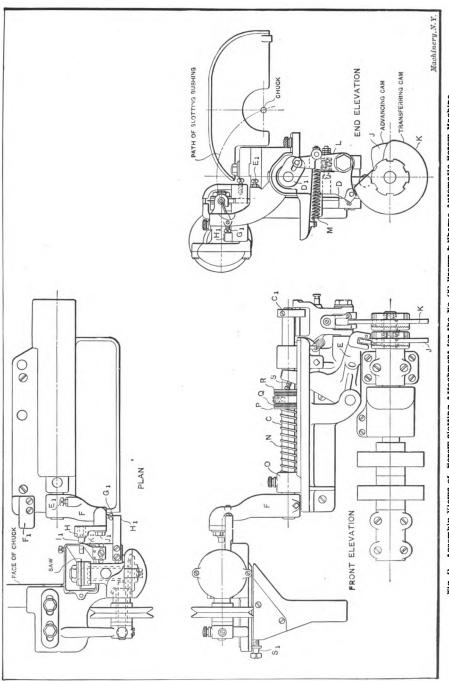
Assembly Views of Screw-slotting Attachment for the No. OU Brown & Sharpe Automatic Screw Machine
